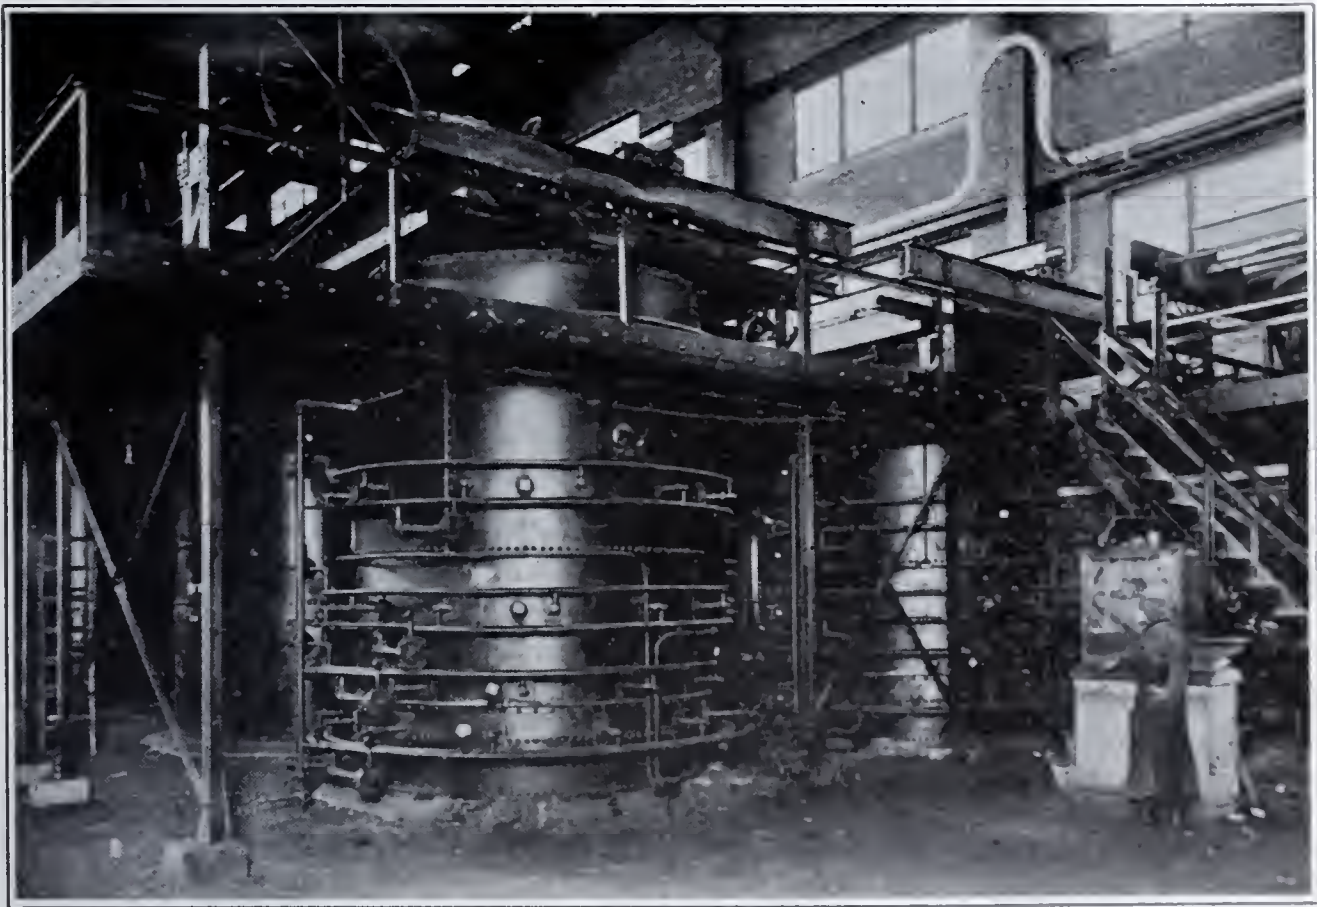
Battery of Surface Combustion Heat Treating Furnaces for Quenching and Drawing Cannon Tubes. Watertown Arsenal. Boston City Gas Used as Fuel.
